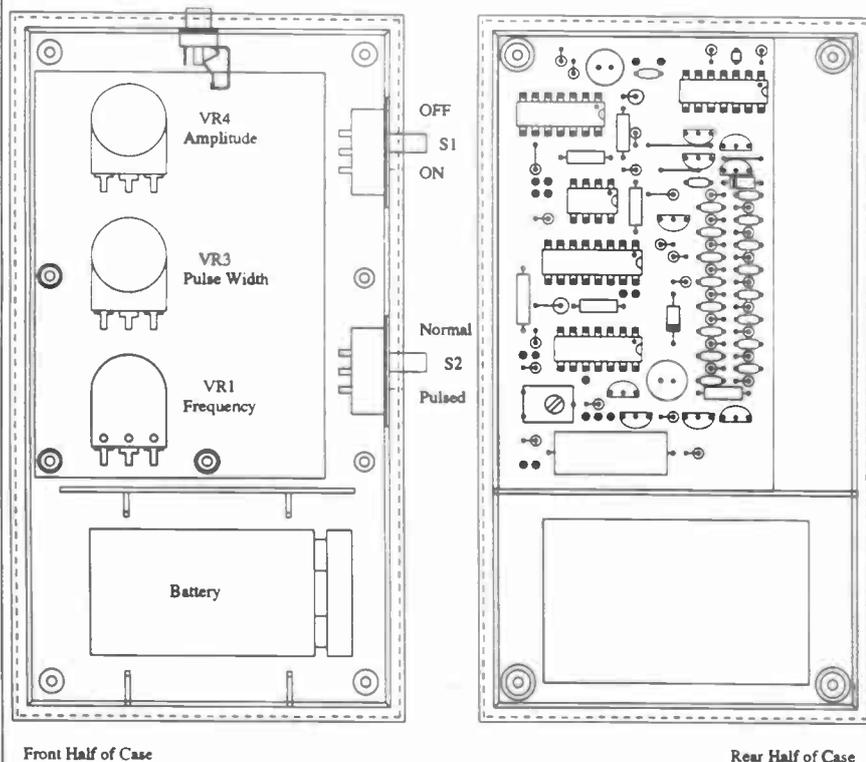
Layout of components inside the two halves of the specified case. Make sure that the connecting tags of the output socket do not touch the metal control mounting plate.
